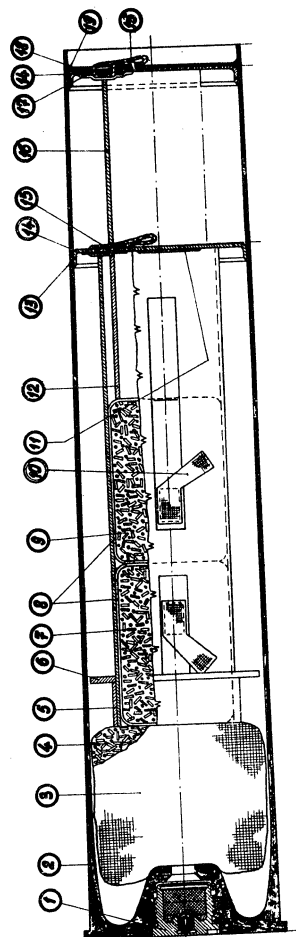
CARTRIDGE CASE WITH PROPELLING CHARGE FOR HIGH EXPLOSIVE SHELL
